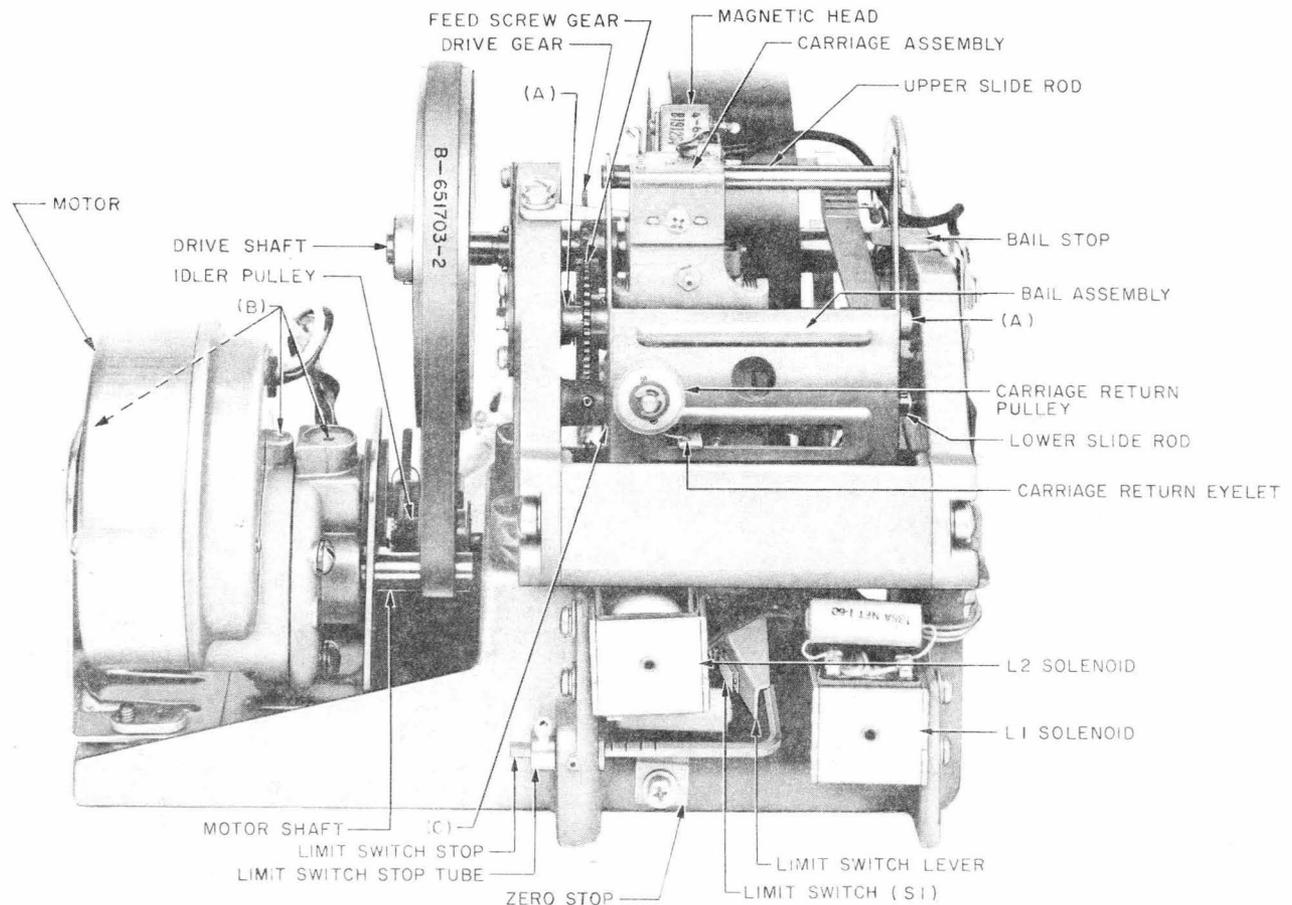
KS-16765, L3, Recorder—Front View (Earlier Type Shown)
